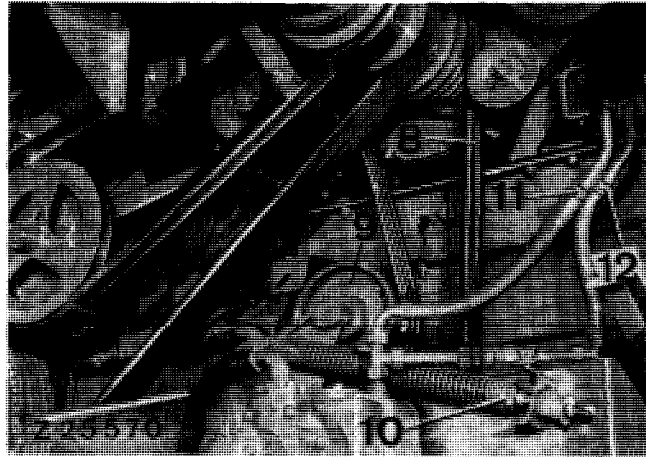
Preparing to Remove Engine (Combine with Hydrostatic Drive)
